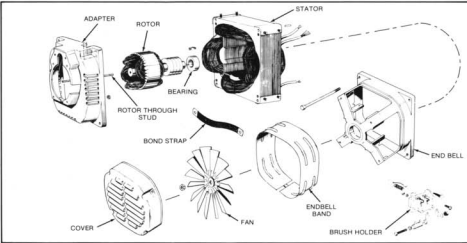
MCCK SPEC "H", 4 POLE GENERATOR ASSEMBLY
